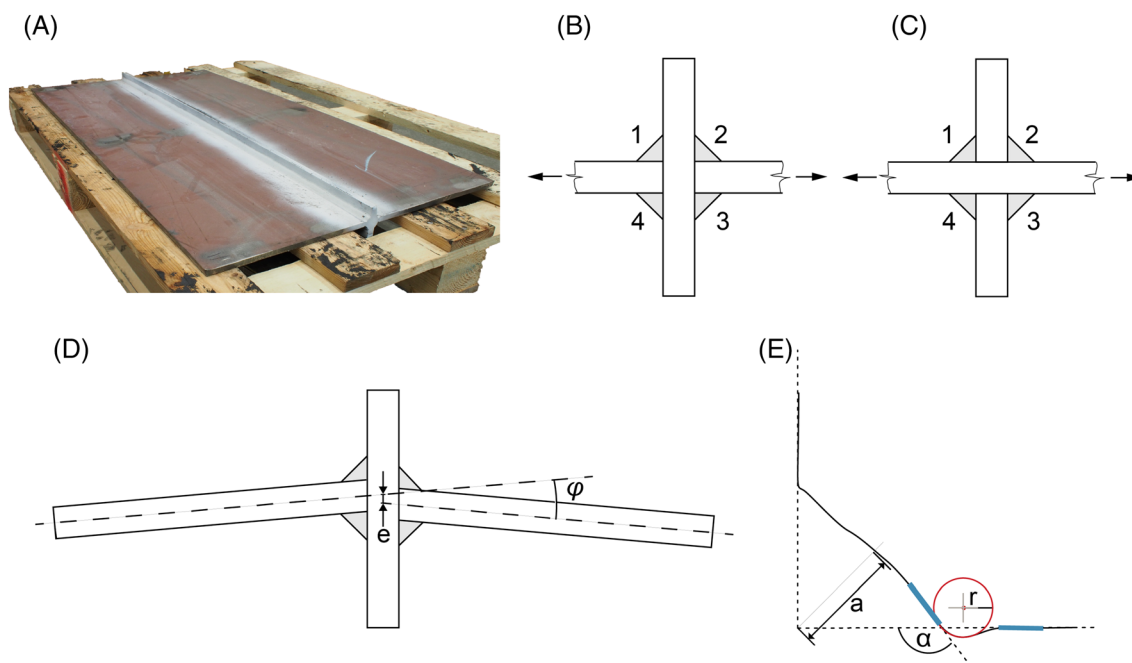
(A) Welded plate with welding sequence for (B) cruciform joint, (C) transversal stiffener, (D) misalignment description, and (E) local weld geometry [Colour figure can be viewed at wileyonlinelibrary.com]
